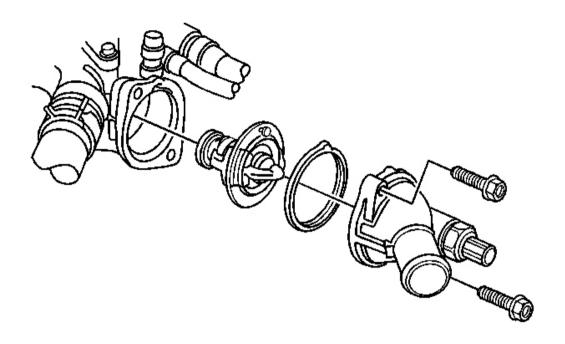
View Of Thermostat With Housing Courtesy of GENERAL MOTORS CORP.
